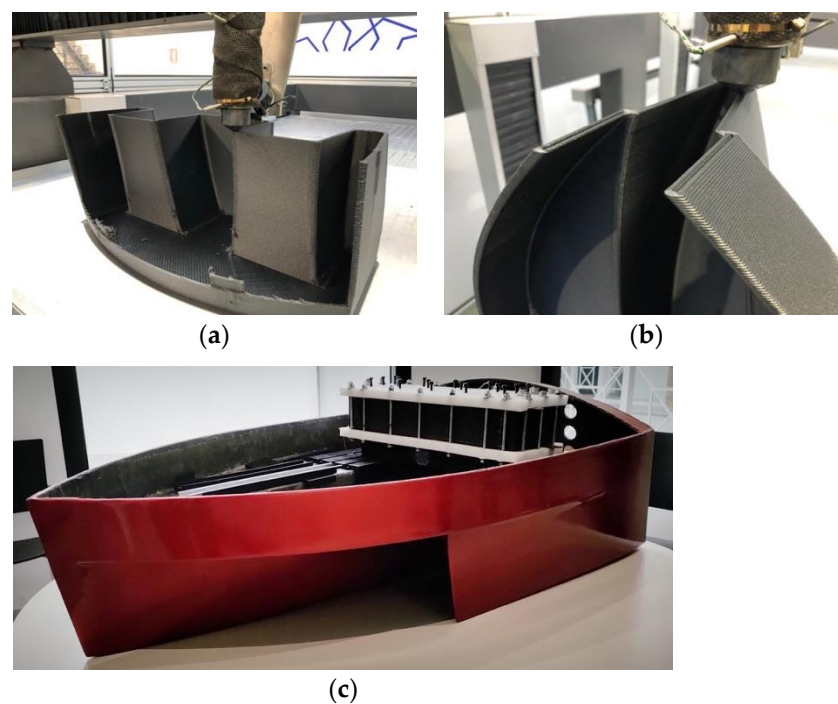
USV hull manufactured with FGF technology. (a) Details of the 3D printing process; (b) details of the double layer that forms the hull; (c) finished hull in the first stage of power plant integration.
